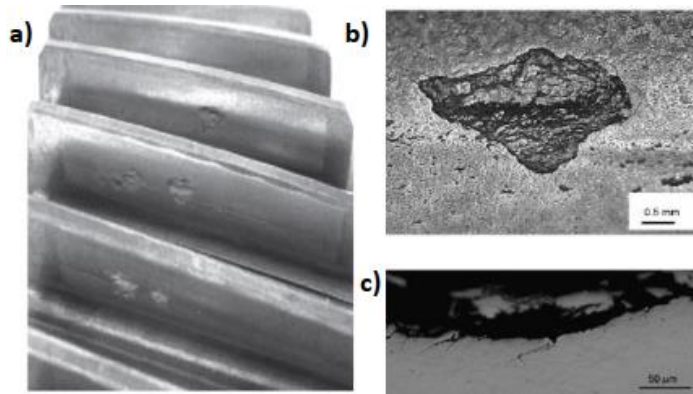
Fatigue damage on a helical gear (a): Overview of top helical surface failure (b): Magnification of spall failure (c): Cross-section of spall failure [92]
